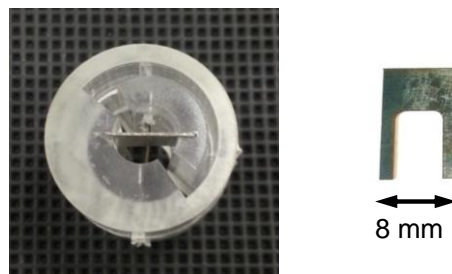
Assembly of a hybrid flexural pivot using SLA water clear material and a wire EDM spring-steel insert
